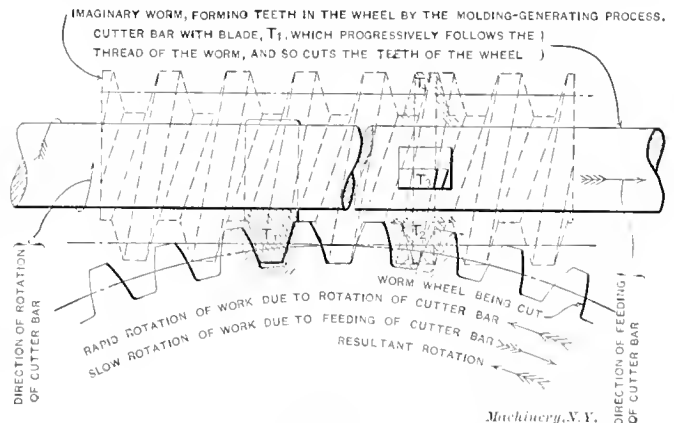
Diagram showing the Principle of the Fly-tool Method of cutting the Teeth of Worm-wheels
